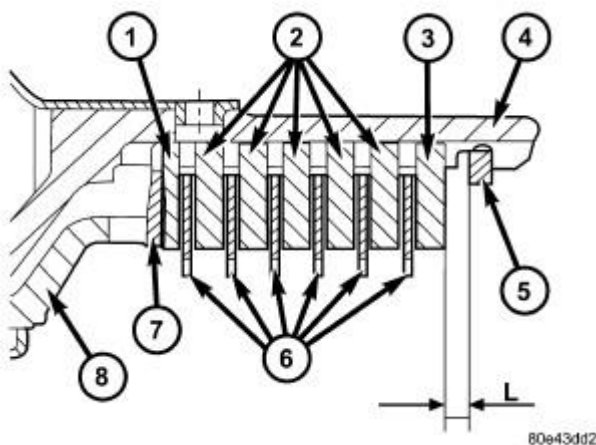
Input Clutch K1 Stack-up - Double Sided Discs
